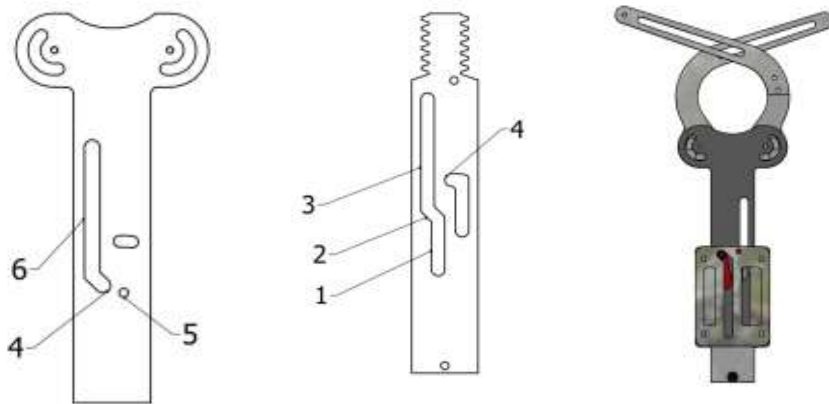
Sliding groove of the locking pin on the clamping bar, rack, and pin release plate.
